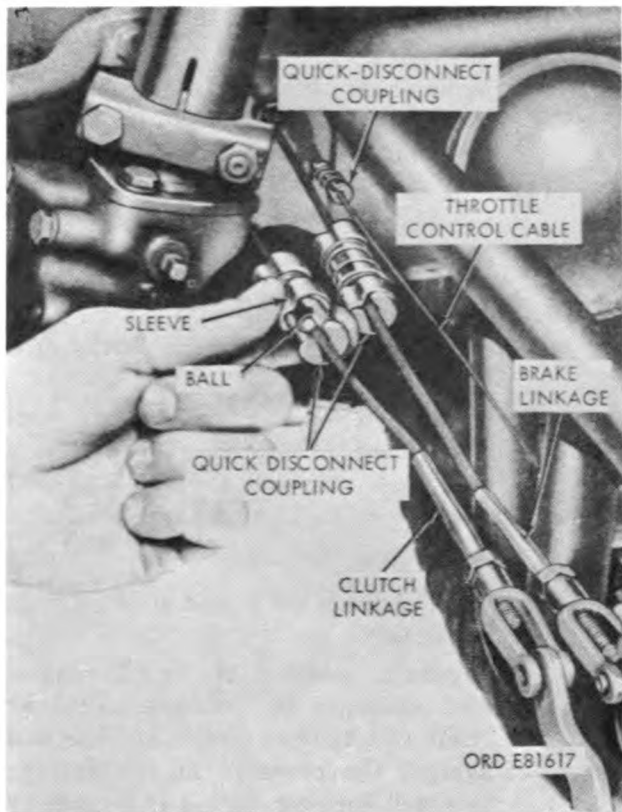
Clutch, brake and throttle quick-disconnect couplings.
